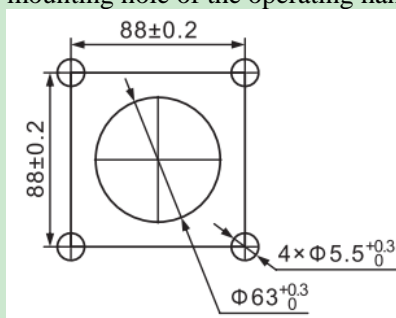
Dimension drawing of the mounting hole of the operating handle out of the A type cabinet
